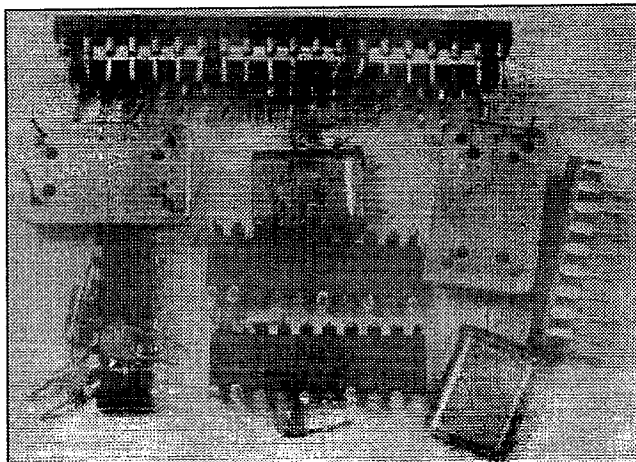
Photo A. Components removed with a heat gun. Note the clean pins, even on a 40-pin socket removed from a 386-25 PC board. The 20-pin chips under the 16 MHz crystal show dirty solder leads. These chips were pulled too soon—not all of the solder was allowed to flow before the chip was pulled.
